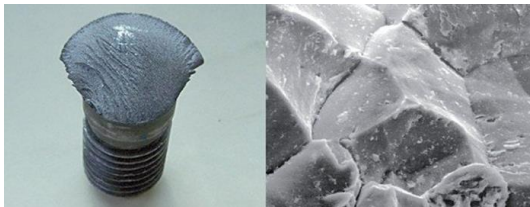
Fractured Steel Bolt (Left) and macroscopic view of the fractured surface of the bolt (Right) [3]
